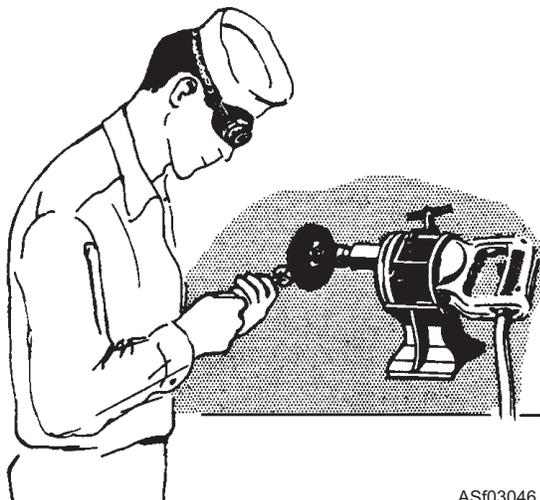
Cleaning a valve with a wire buffing wheel.
